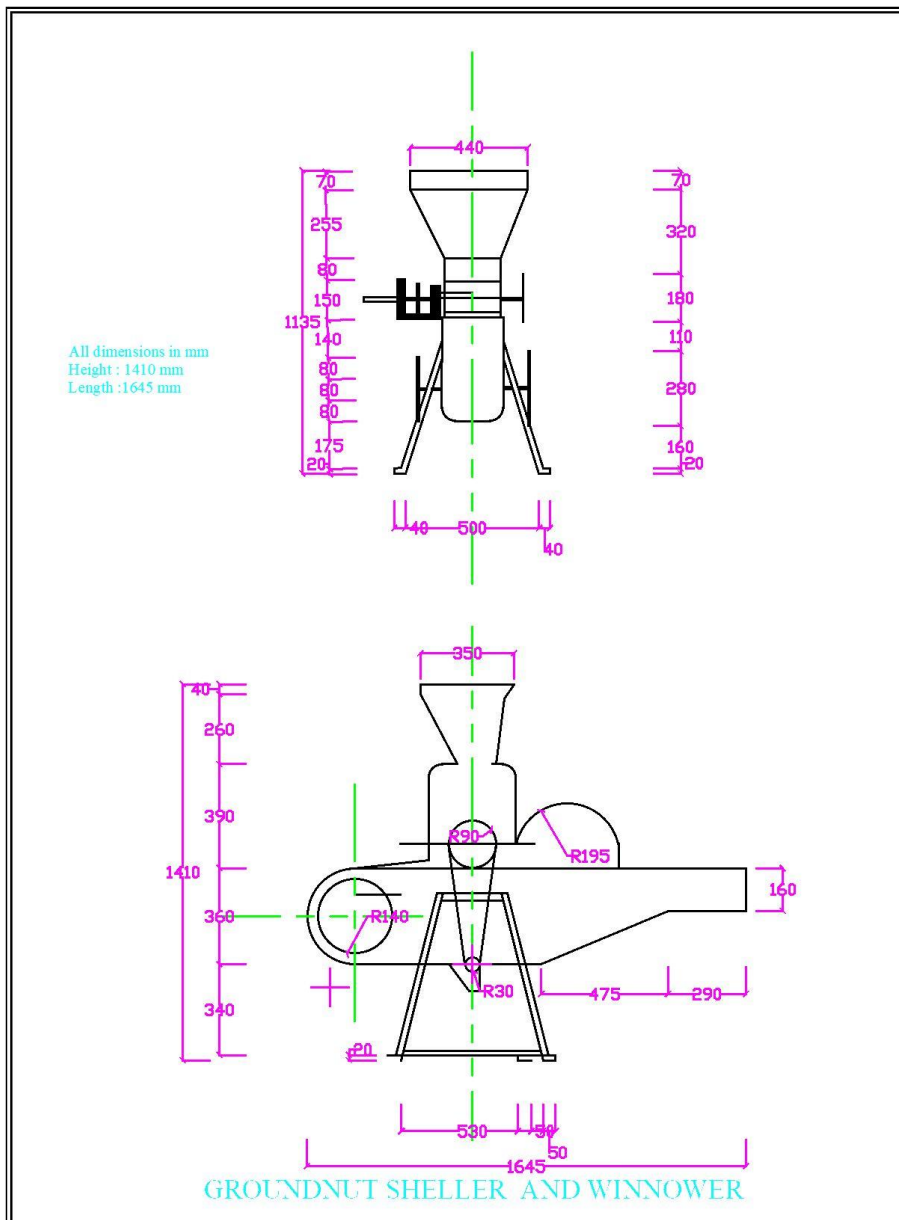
2in1 Groundnut Sheller and Winnower Design
